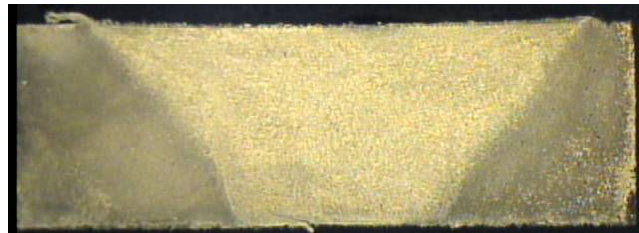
Cross section of weld produced under traverse force control mode.
